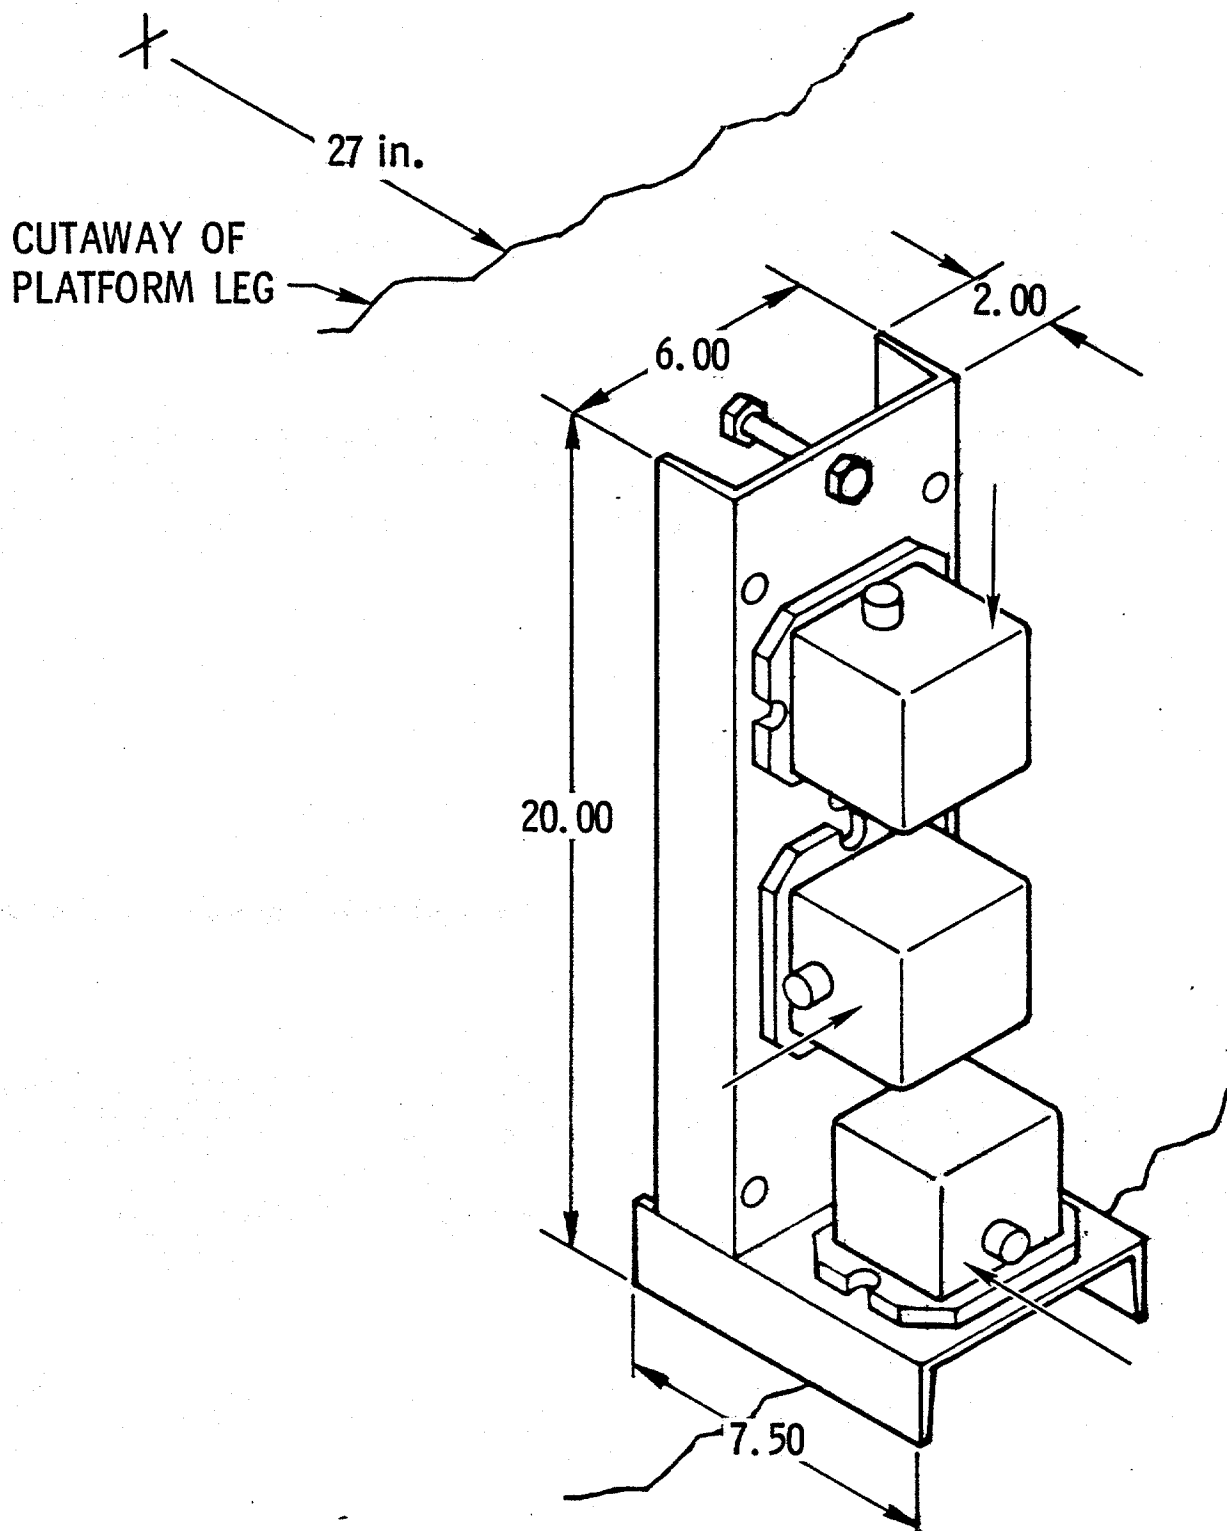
Mounting Fixture With Three FBA-1 Accelerometers
